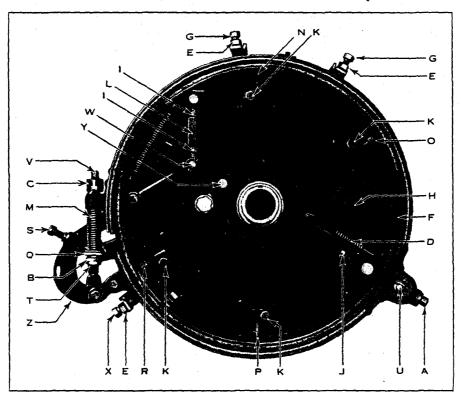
V-63 Rear Wheel Brakes (L. H.)
